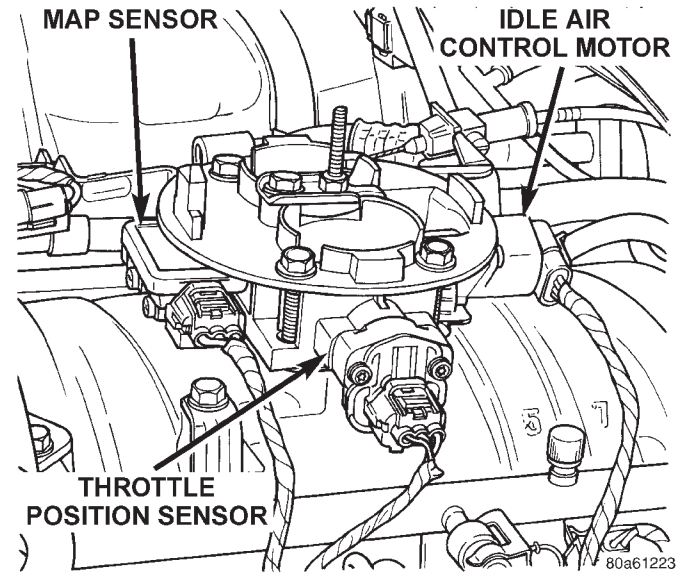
MAP and Throttle Position Sensor Location—5.2L/5.9L Engines
